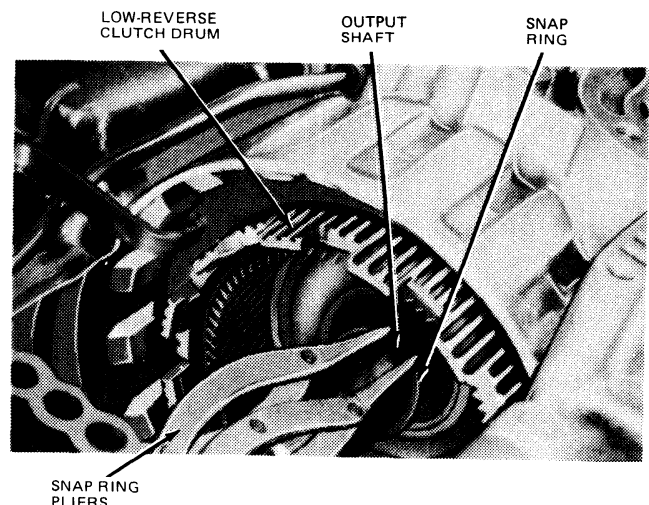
Removing or Installing Reverse Ring, Gear Hub, Snap Ring
